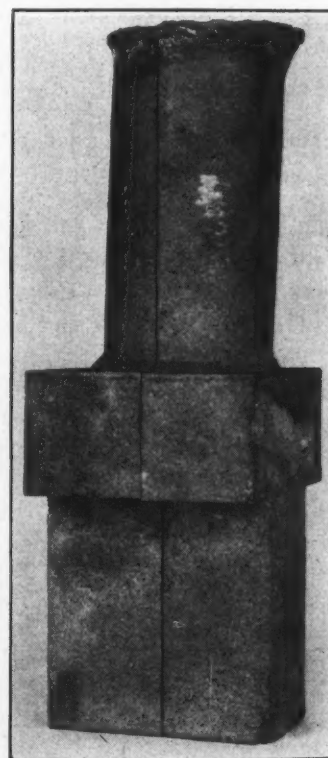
Keel block test casting with riser. Note line showing where castings were later sectioned.
